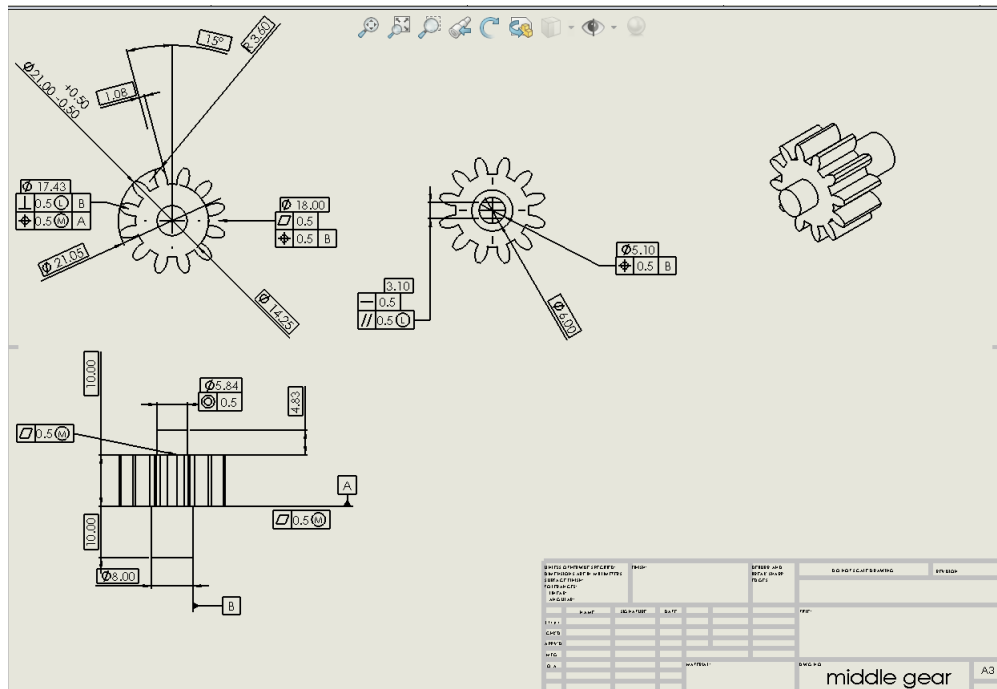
Engineering Drawing of SCARA Middle Gear (millimeter precision)
